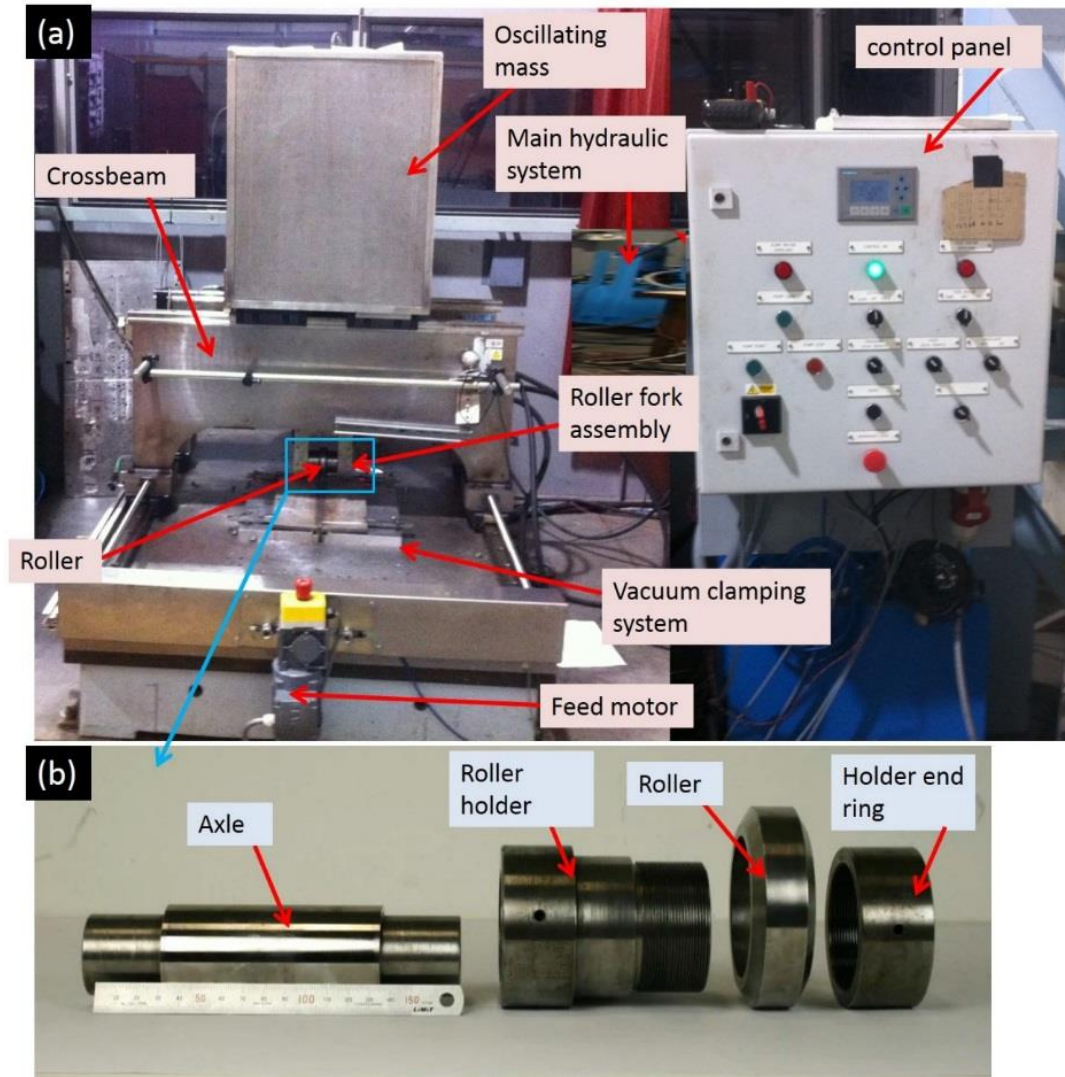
(a) Rolling device set-up (b) Roller assembly
